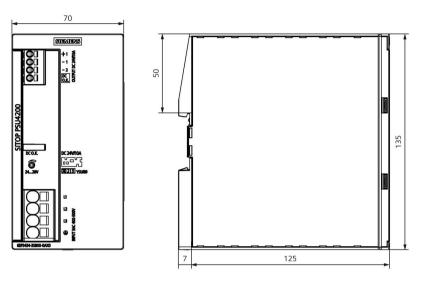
Dimension drawing 6EP3434-3SB00-0AX0 (24 V/10 A)
